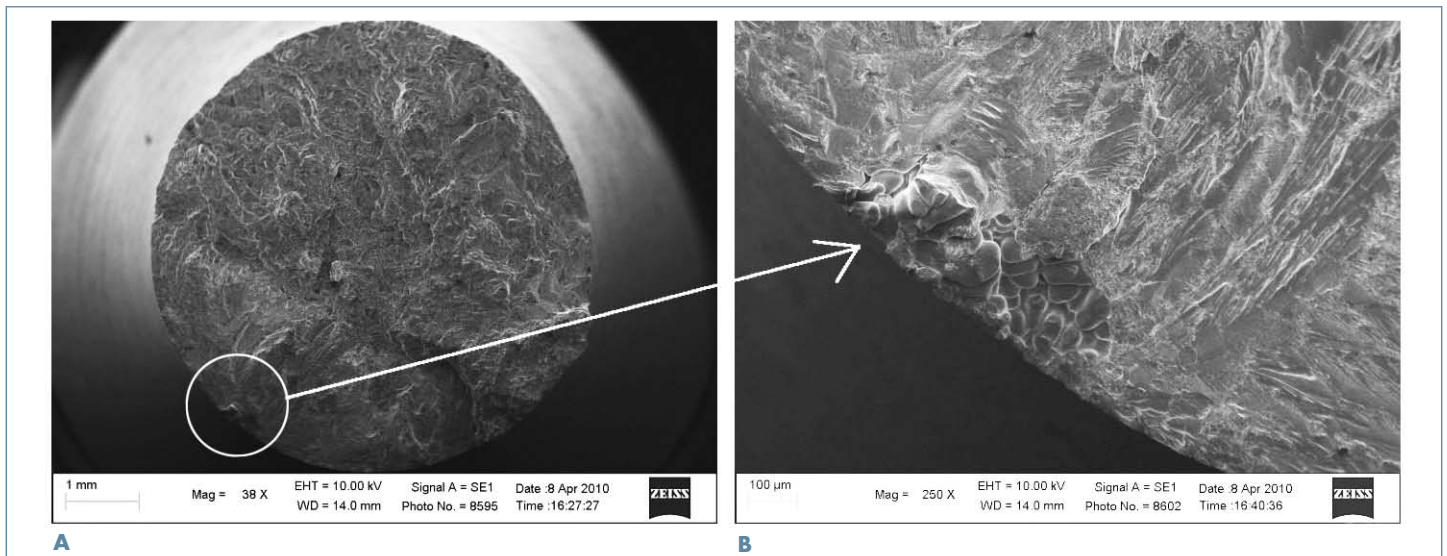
Fracture surface of a fatigue specimen (a) and detail of the defect that initiated the crack (b).
